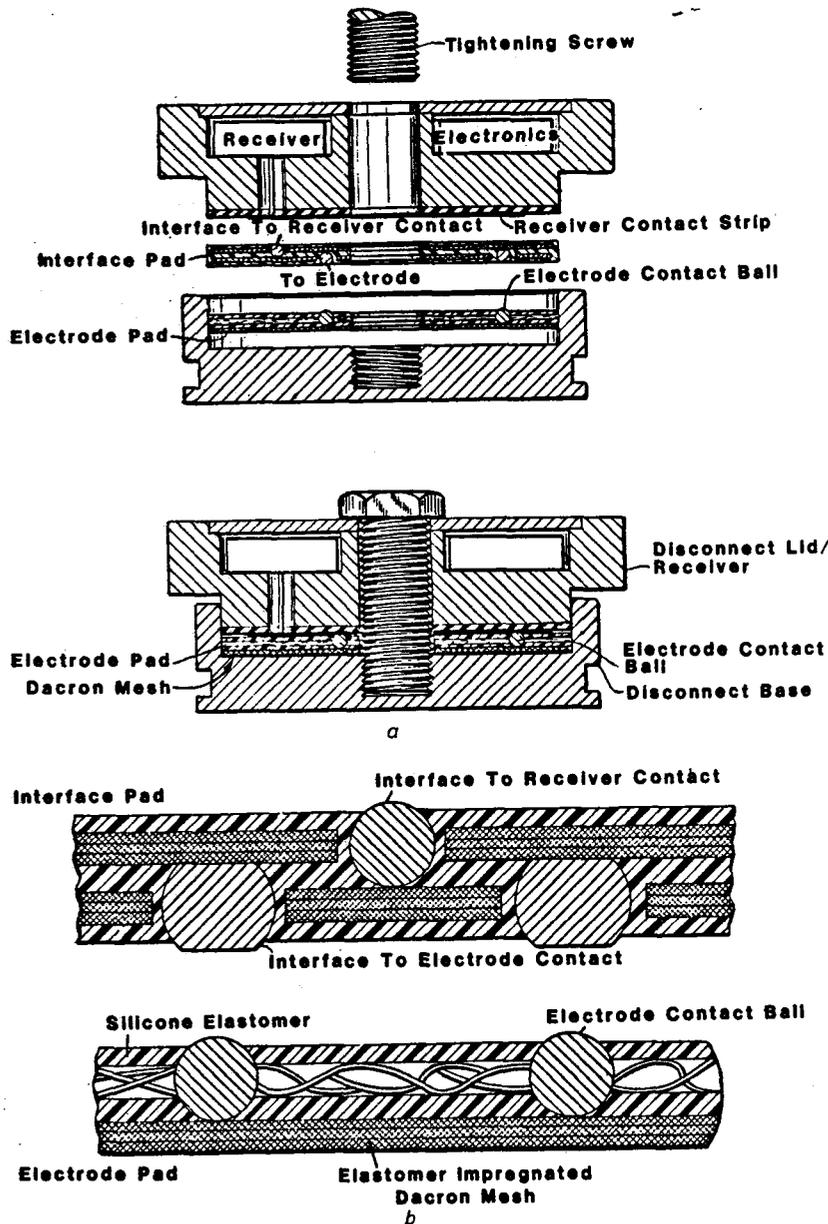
(a) Cross-sectional views of the surgical disconnect assembly configured for use with a percutaneous disconnect cable. The interface pad can be removed to establish direct telemetric links between receiver contact strips and electrode contact balls. Outer diameter = 18 mm, height = 7 mm. (b) Structural detail of the connection pads and metal contacts for the percutaneous interface cable and the electrode array. Note that the interface pad has two sets of connector balls—a round upper set for contact with the Yaf platinum foil buss bars on the bottom of the receiver and a flattened lower set for contact with the round balls from the electrode array pad. Both pads include densely woven nylon fabric to prevent vertical migration of the balls through the silicone elastomer when clamped under pressure in the disconnect assembly. Ball diameter = 0.5 mm
